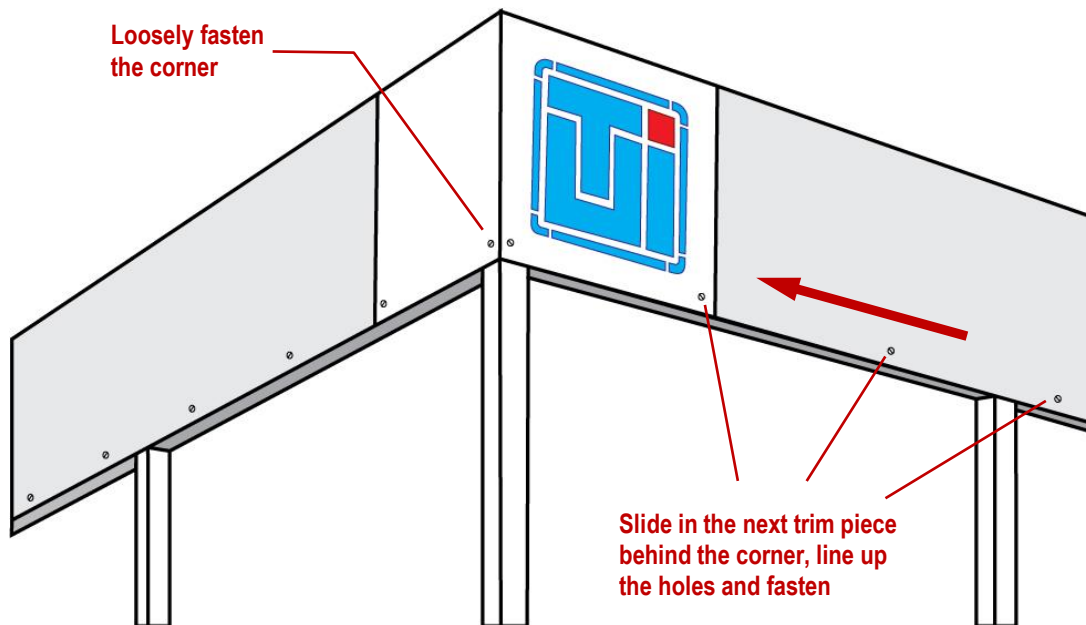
Loosely fasten all corner trimming in place and then slide the long trim sections underneath the corners until the holes align
